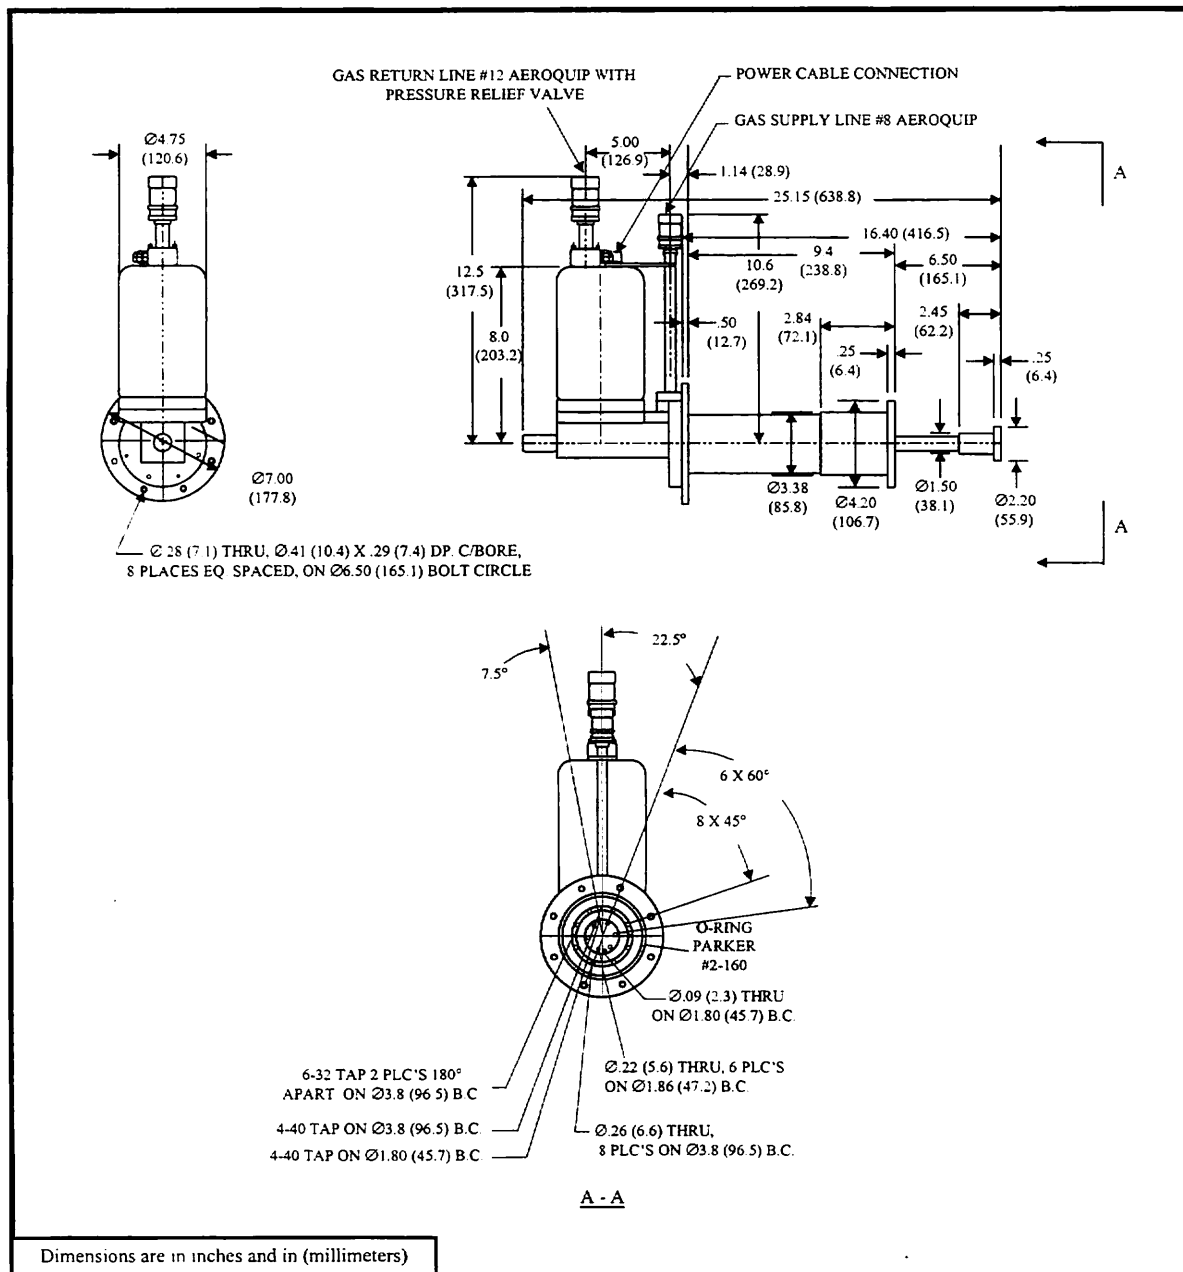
OUTLINE DRAWING FOR THE COOLPOWER 445 & 130
